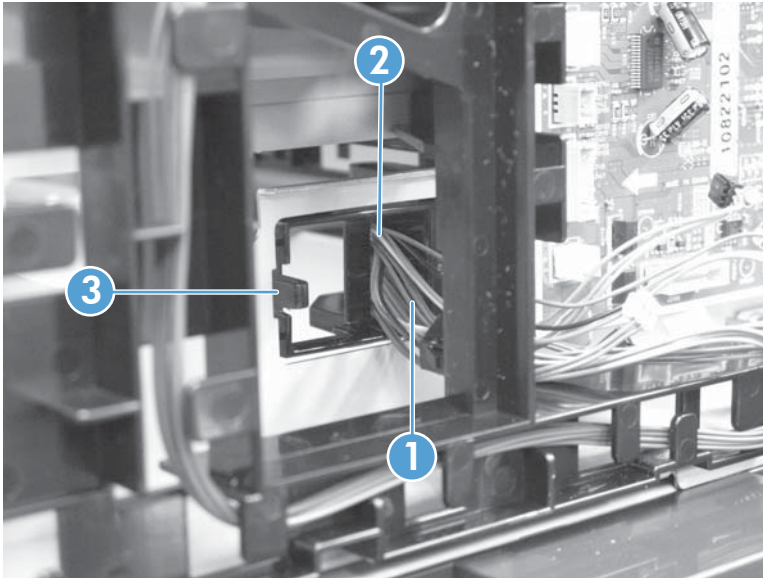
Remove the stapler/stacker alignment assembly (1 of 7)
